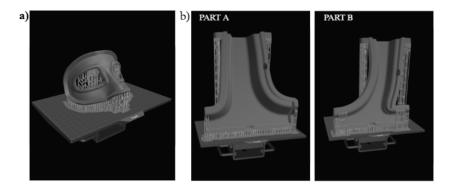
Print setup of the mold in Chitubox: a) Face Mask mold, Version B, b) the B-Pillar mold-Part A on the left and Part B on the right.
